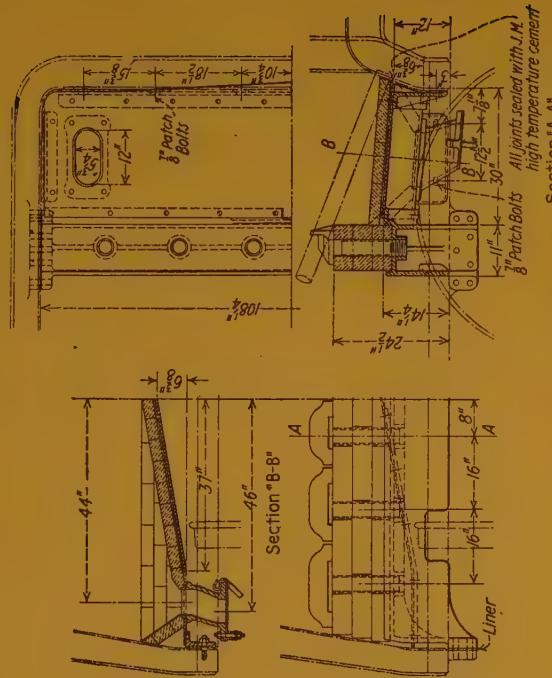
Arrangement of the Ganes wall in the firebox.
